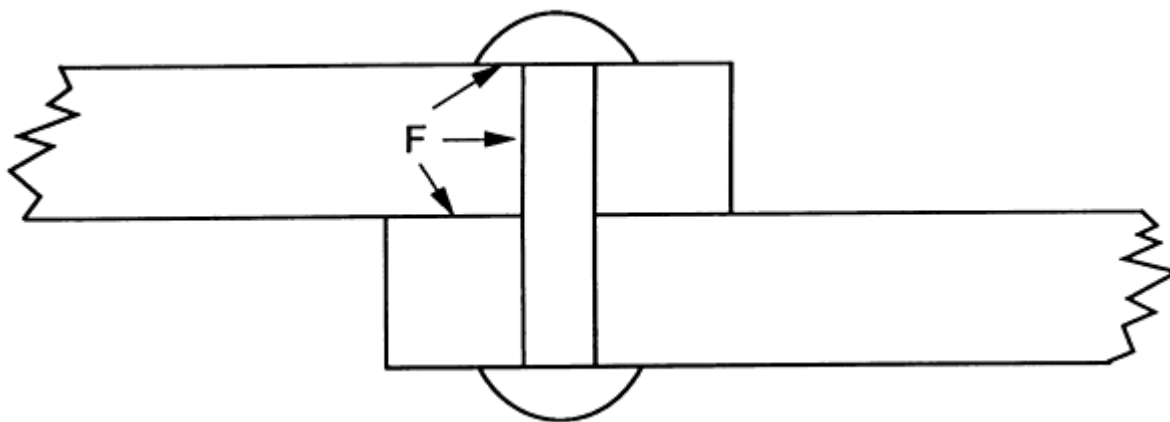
Locations (indicated by F) prone to fretting in an aluminum-steel riveted joint
